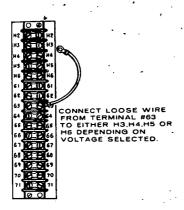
CONNECTING LEAD FROM TERMINAL 63
